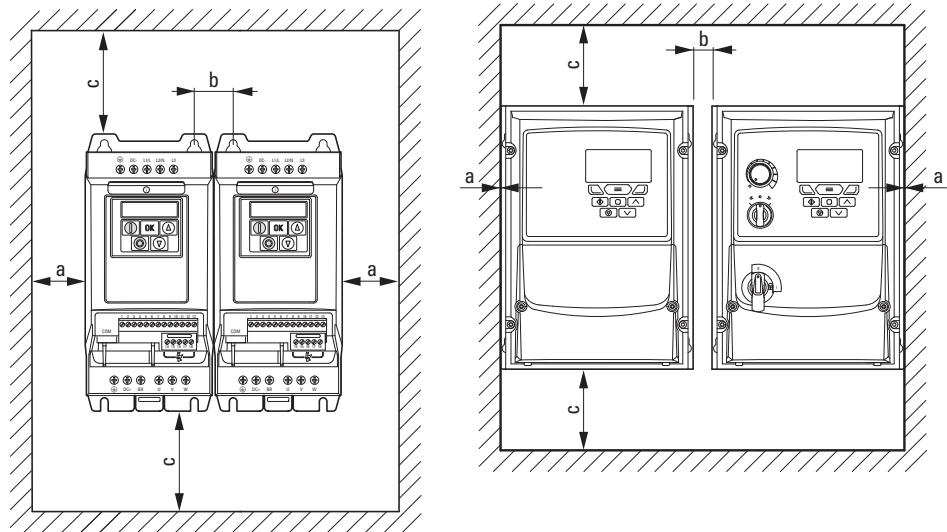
Clearances for air cooling (left: IP20; right: IP66)
